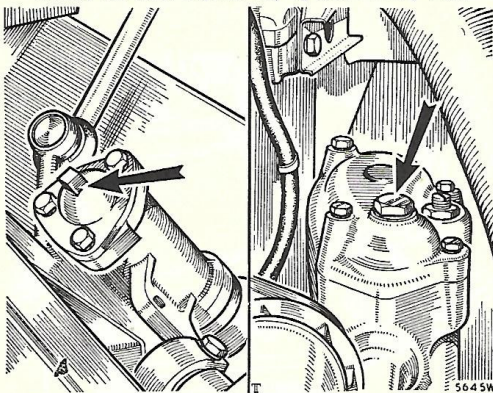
The steering idler and steering gearbox filler plugs.
